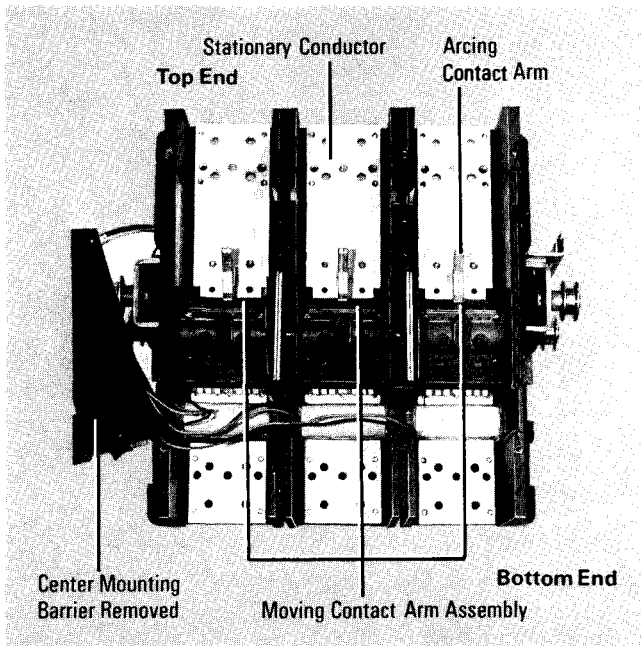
View of 1600 Amp Breaker With Center Mounting Barrier Removed.
